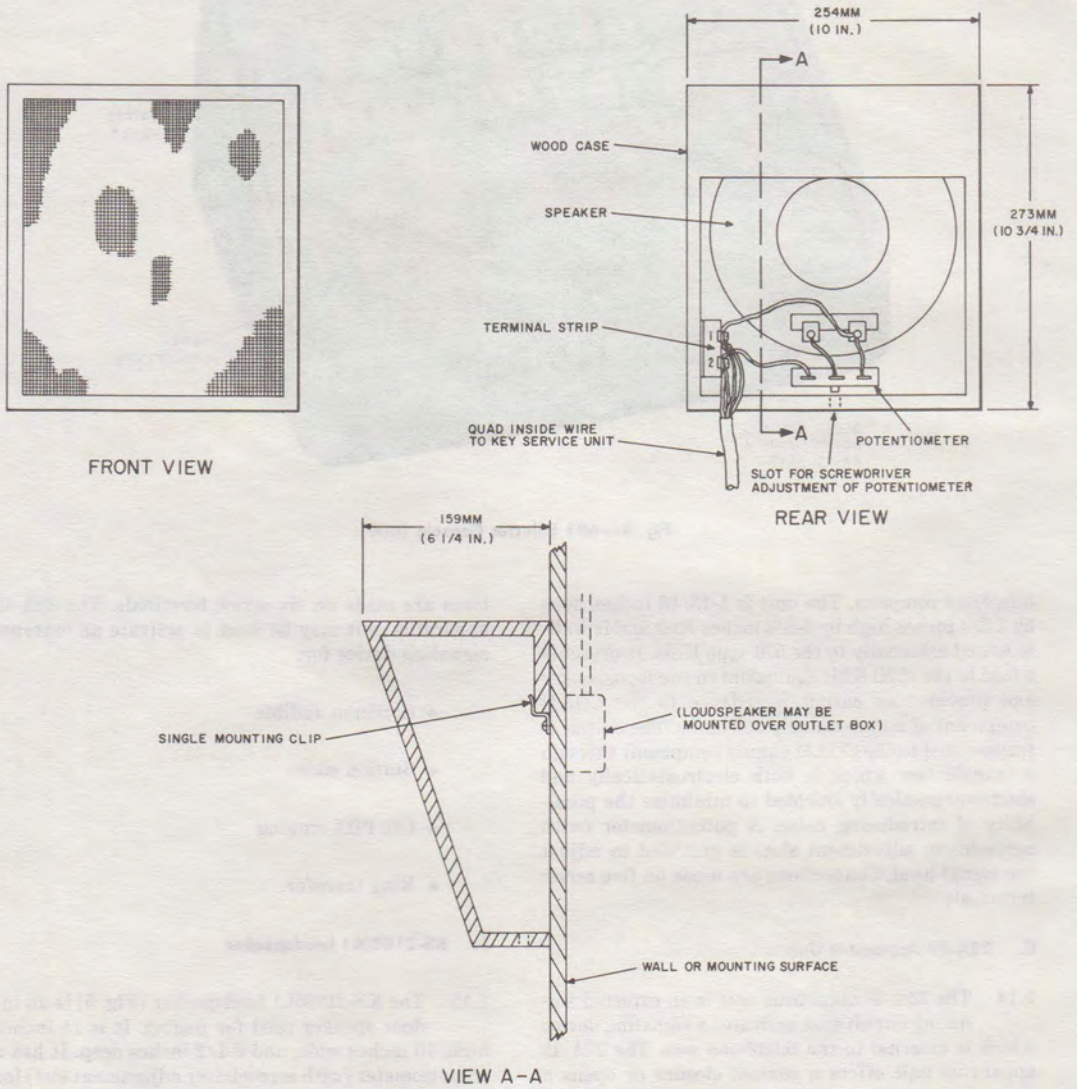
KS-21880L1 Loudspeaker, Connections, and Mounting
